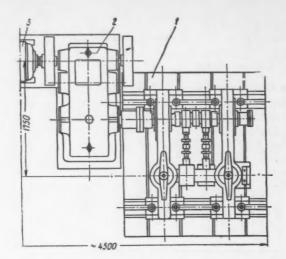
Pendulum mill: 1) roll stand; 2) two-stage reducer; 3) electric motor.
